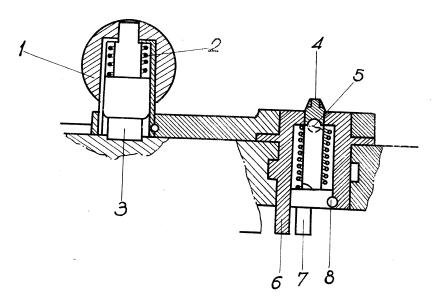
RECOCKING HANDLE ASSEMBLY
